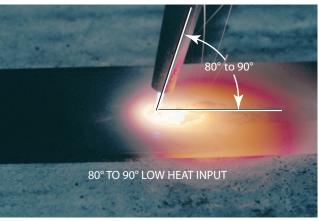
Changes in the angle between the torch and the work will change the molten weld pool produced.
